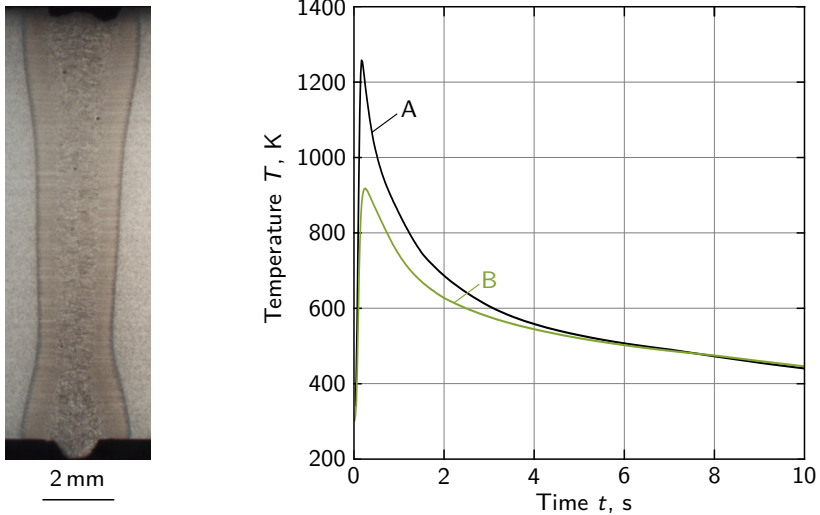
(left) Metallographic cross-section of the 12 mm thick S355J2+N steel sheets, extracted at the middle of the weld seam; (right) temperature measurements on the top (A) and bottom (B) surfaces of the specimen
